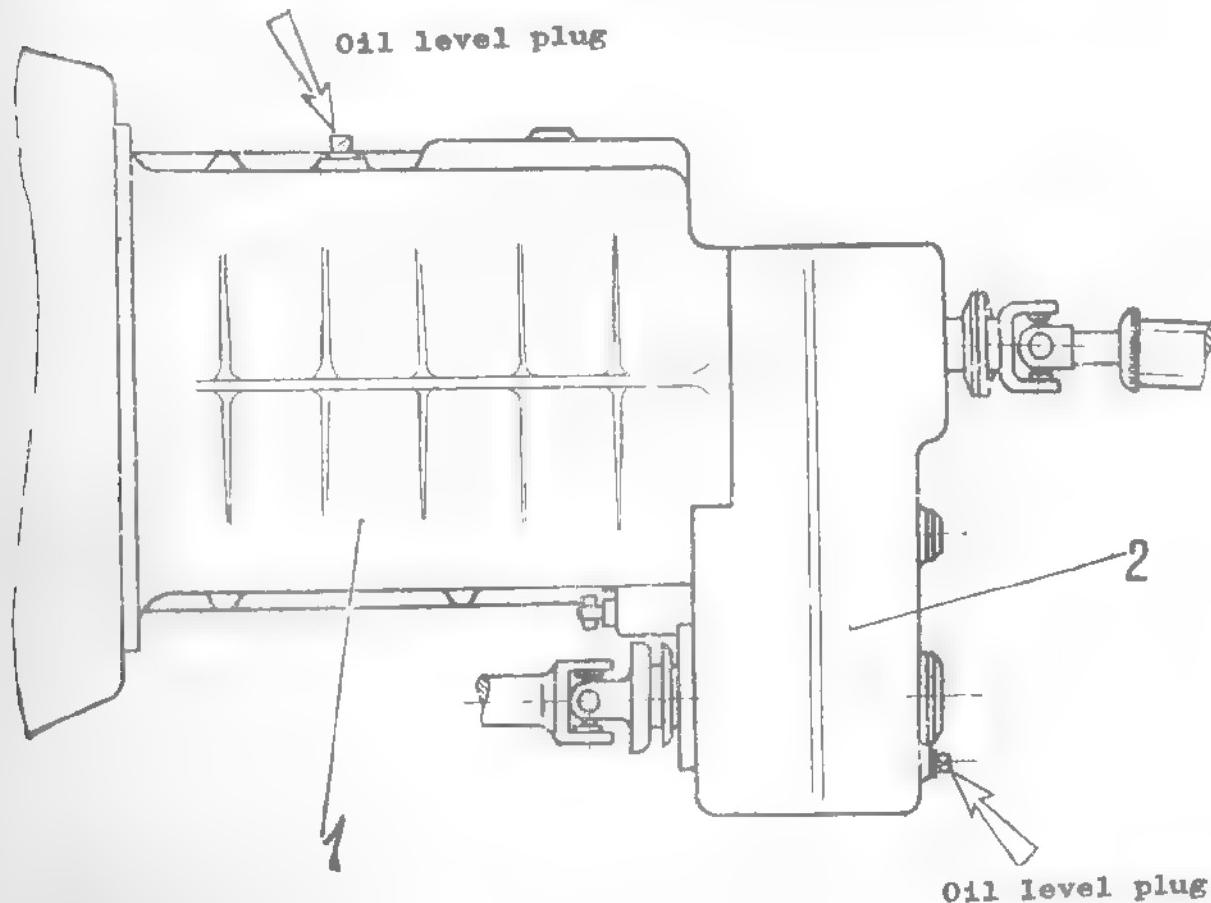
TOP VIEW OF GEAR TRANSFER BOX
